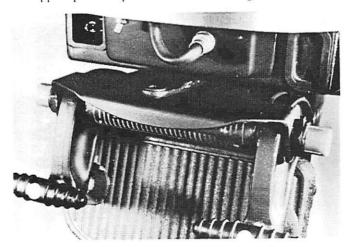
Support Plate Installed Section VIIIC – Miscellaneous
